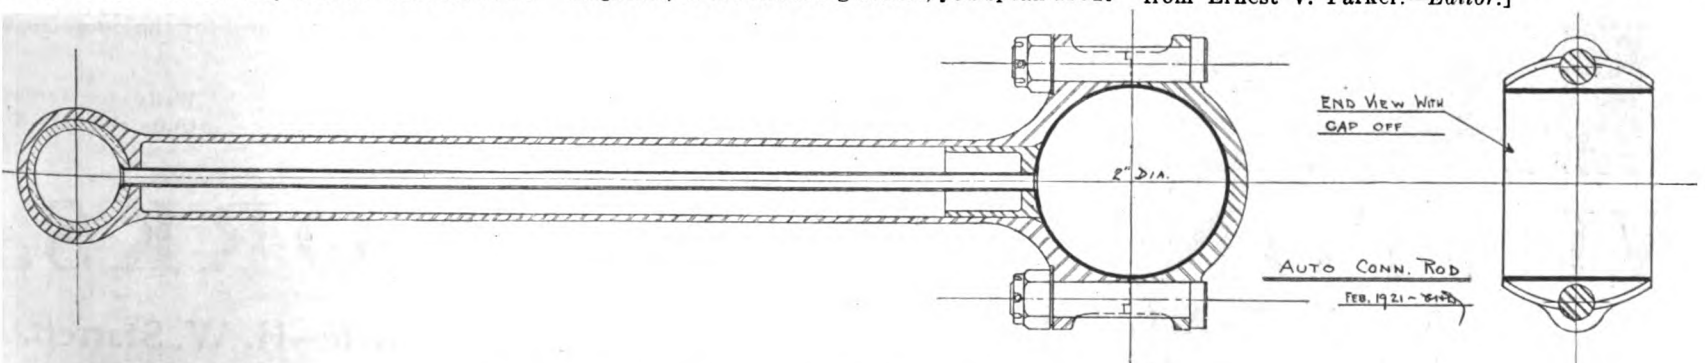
Design of crankpin box referred to by Mr. Dengler.
